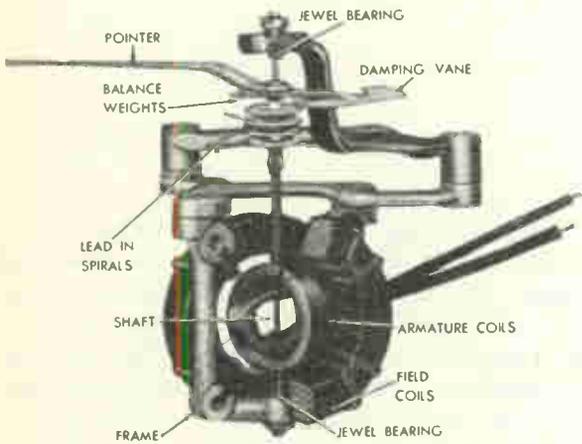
Cutaway view of mechanism of crossed-coil power-factor meter
